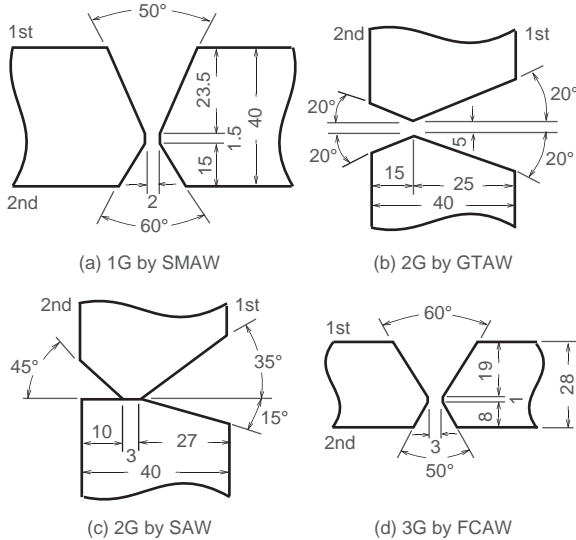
Typical groove configurations for SMAW, GTAW, SAW, and FCAW used for joining 9% Ni steel components in fabrication of an LNG tank.
